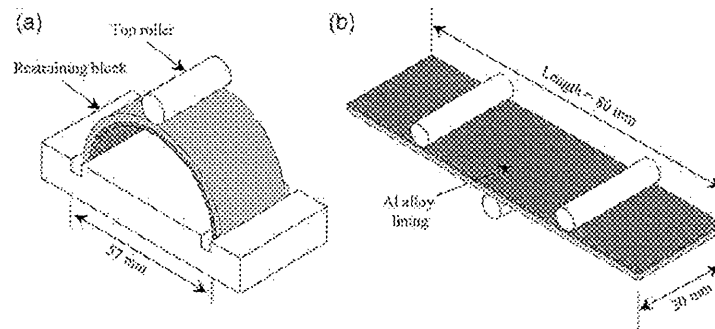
Three point bend set-up for (a) half shell bearings and (b) flat strip sections.
